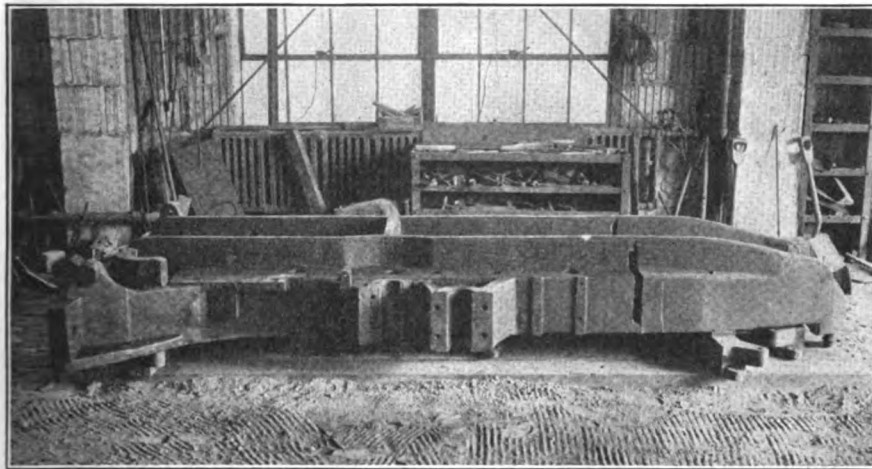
THE FRACTURED SECTIONS LINED UP FOR WELDING
